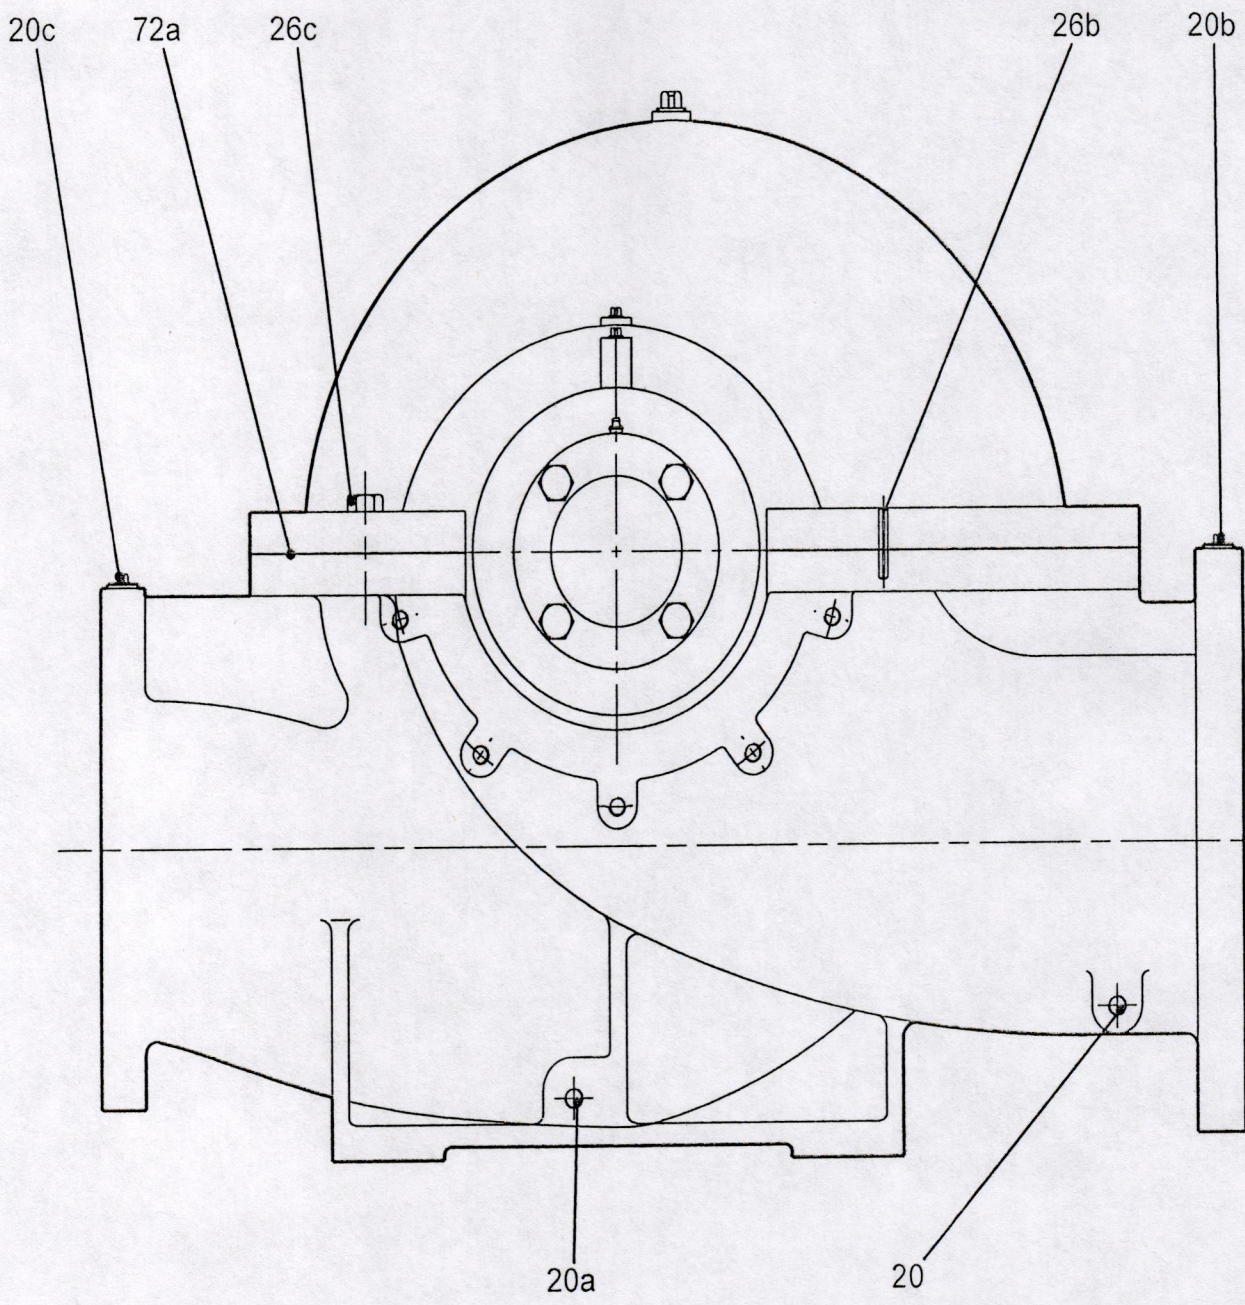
Sectional view, construction XK/XV, with mechanical shaft seals
